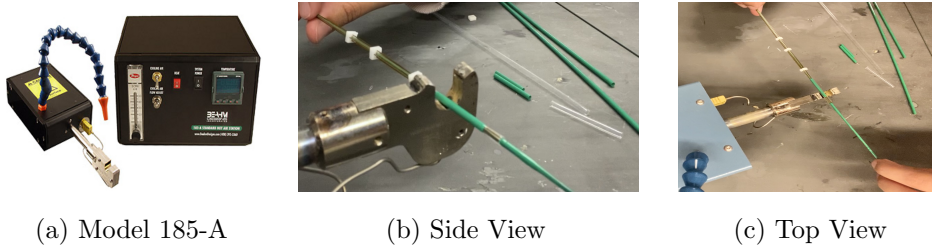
(a) is the BEAHM Designs Standard Model Hot Air System, (b) is a side view of the manufacturing process, and (c) is a top view of the manufacturing process.
